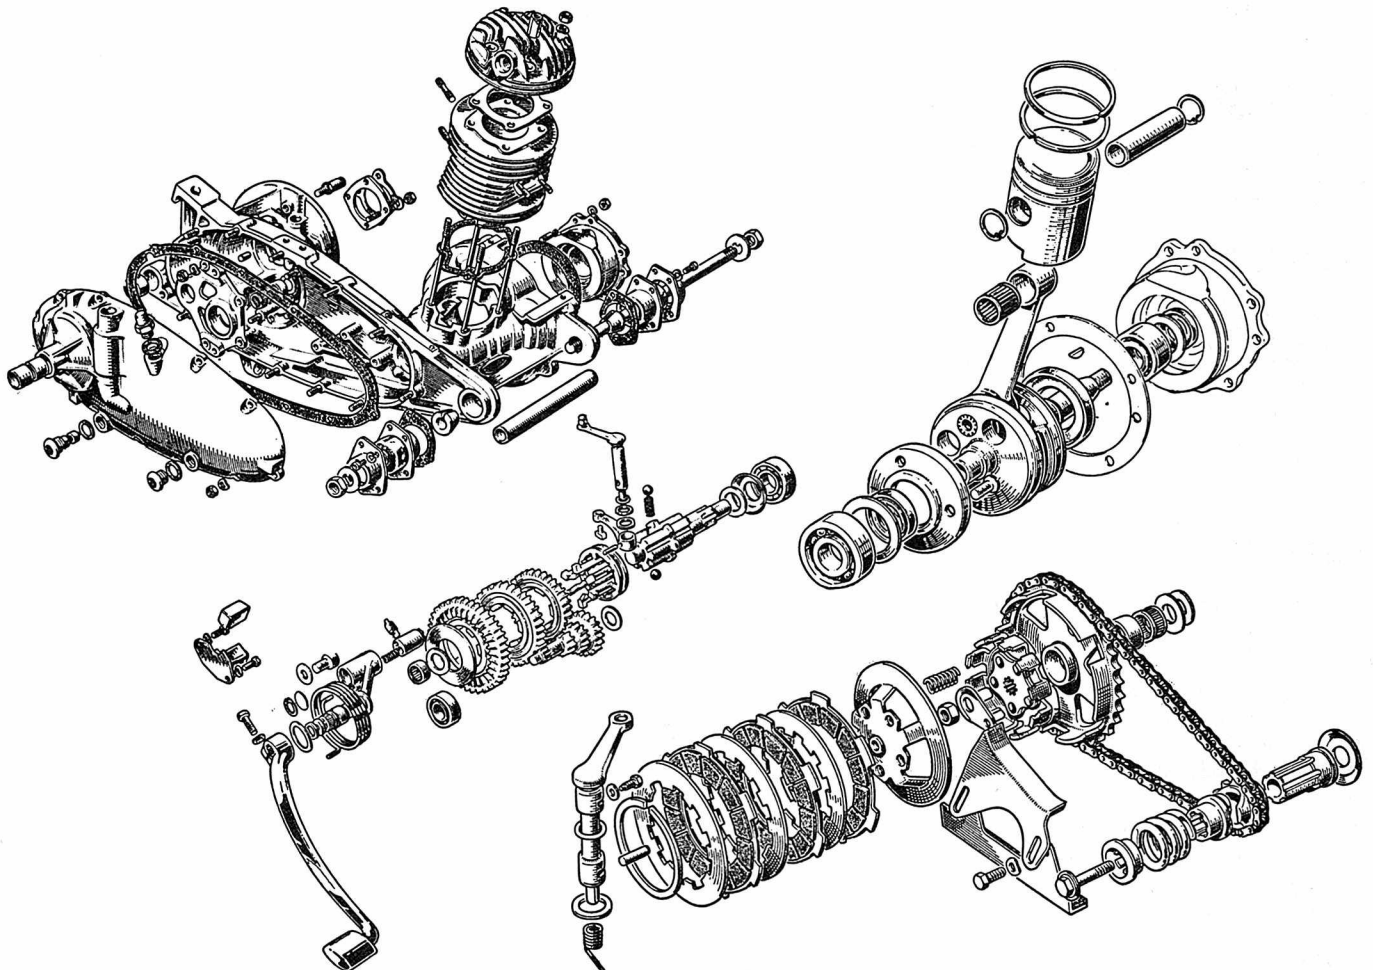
Exploded view of Cento three speed transmission, clutch and engine assembly.
